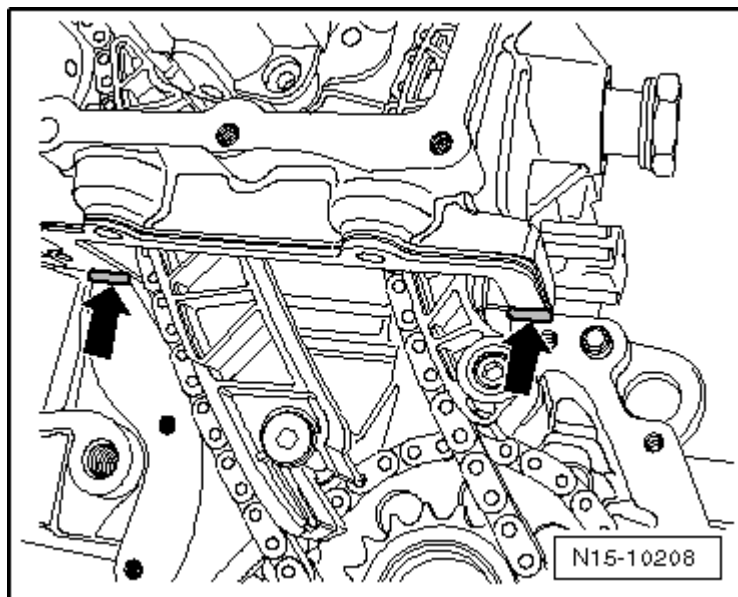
Identifying Sealant Locations For Corners Of Cylinder Block/Cylinder Head
